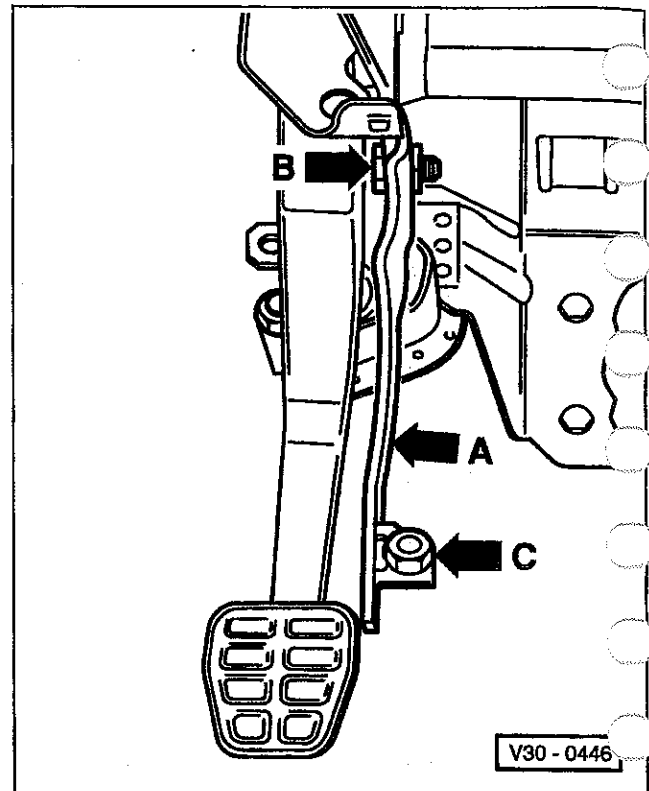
Remove bolt (B) and nut (C) to remove support bracket
